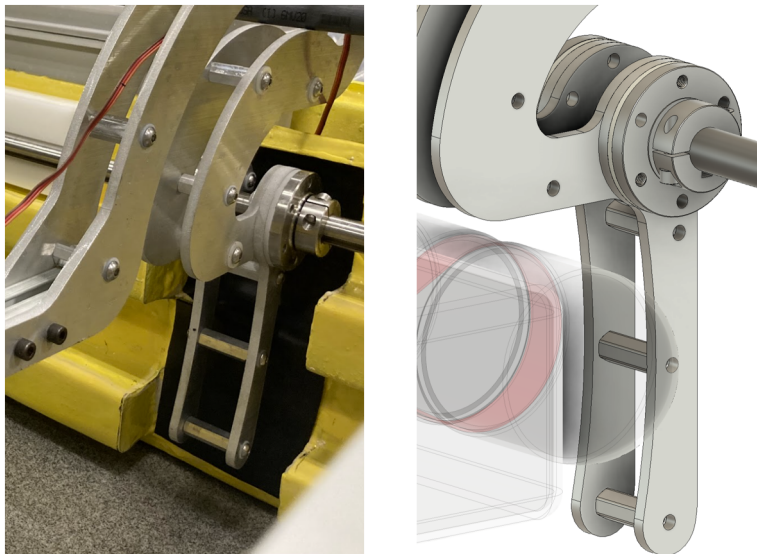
The final design of the basket rest mounted to the arm. The stackup of pieces to attach the arm to the shaft is also visible.
